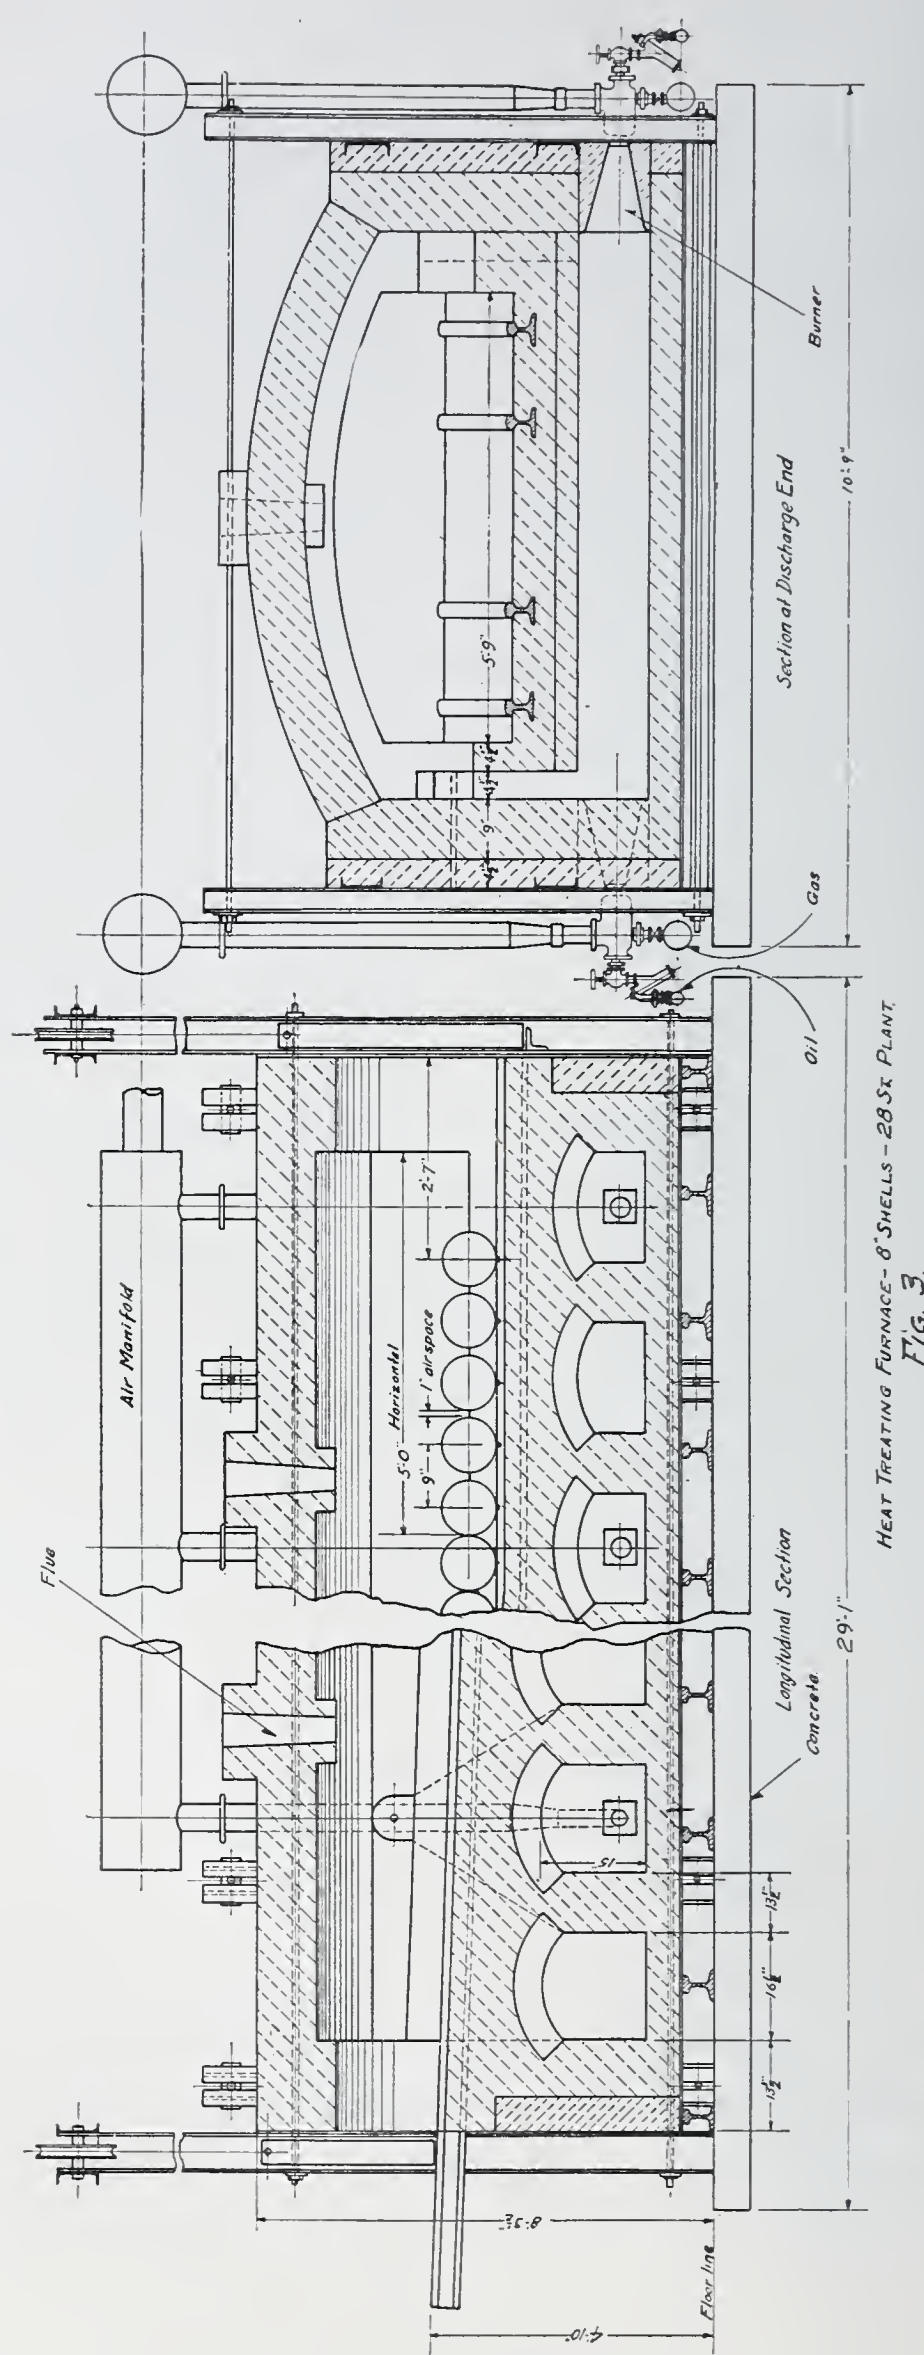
Heat-Treating Furnace for Eight-Inch Shell. Bottom-Fired Type.
